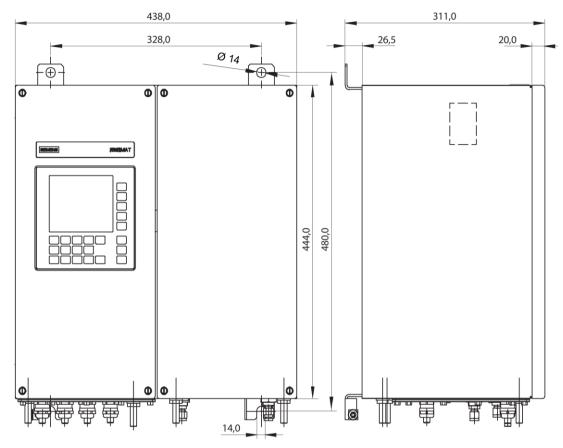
ULTRAMAT 6F and OXYMAT 6F, dimension drawing: Front view and side view
